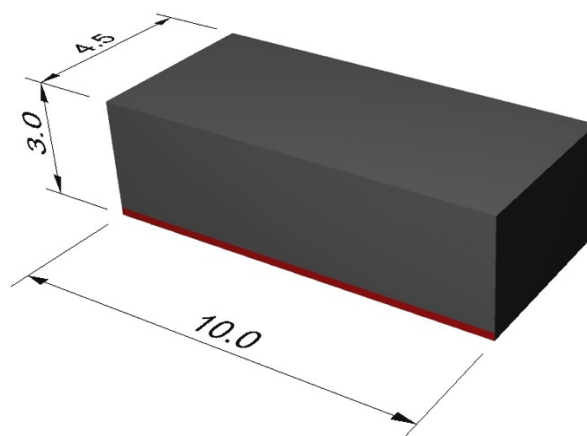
Nominal dimensions and final thickness of the experimental pieces (bricks)
